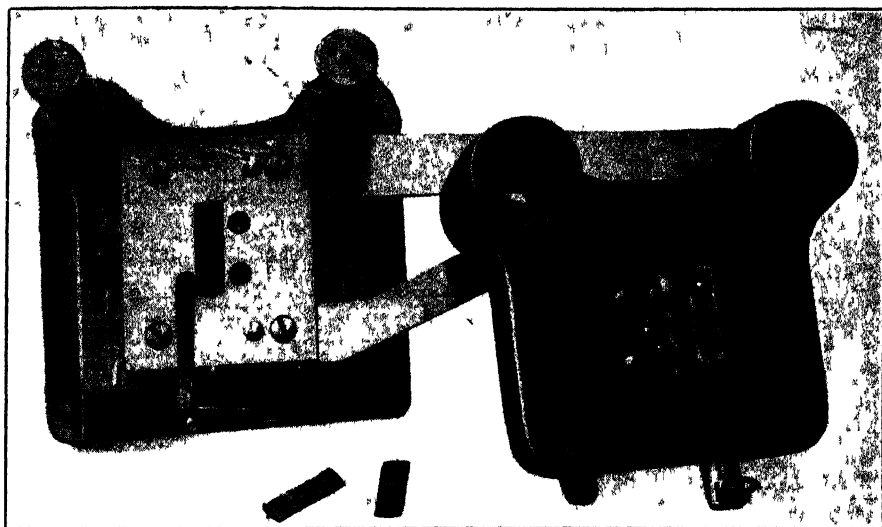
Progressive tools for piercing and blanking a rectangular part
